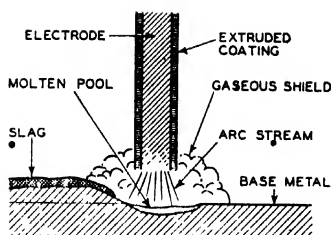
ILLUSTRATING THE ACTION OF A HEAVILY COATED ELECTRODE DURING THE WELDING OPERATION
